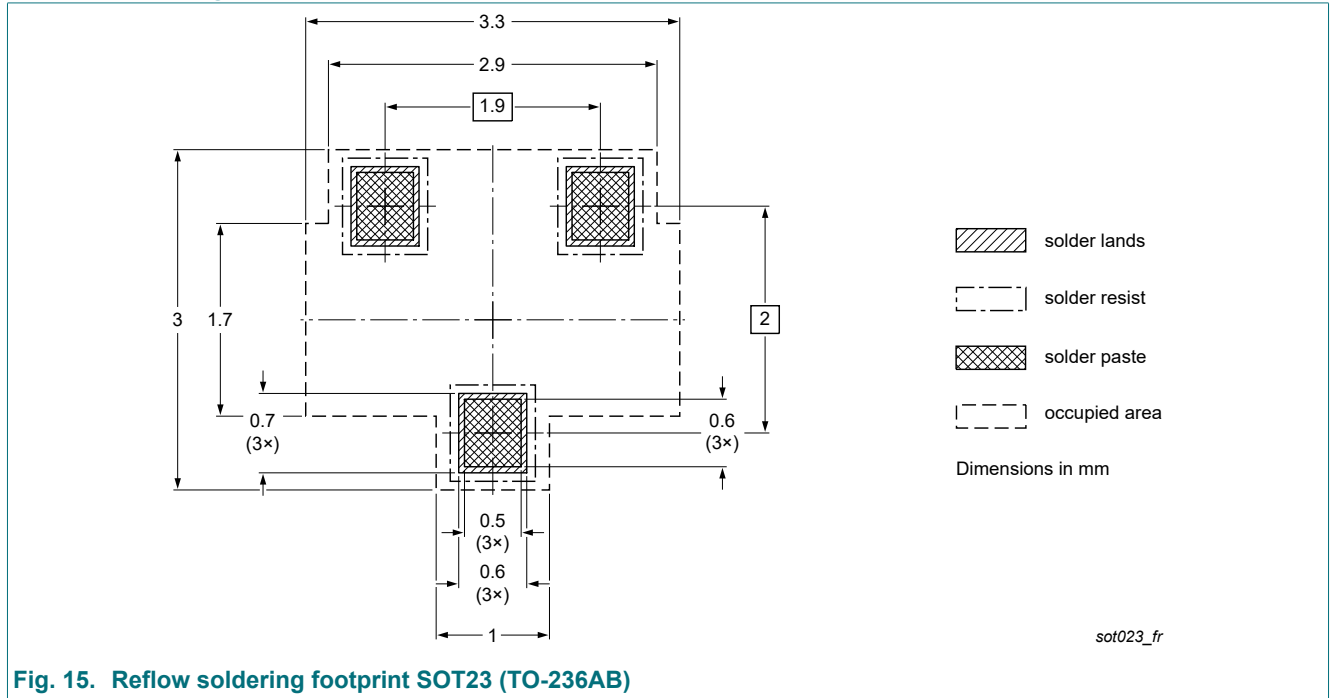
Reflow soldering footprint SOT23 (TO-236AB)
